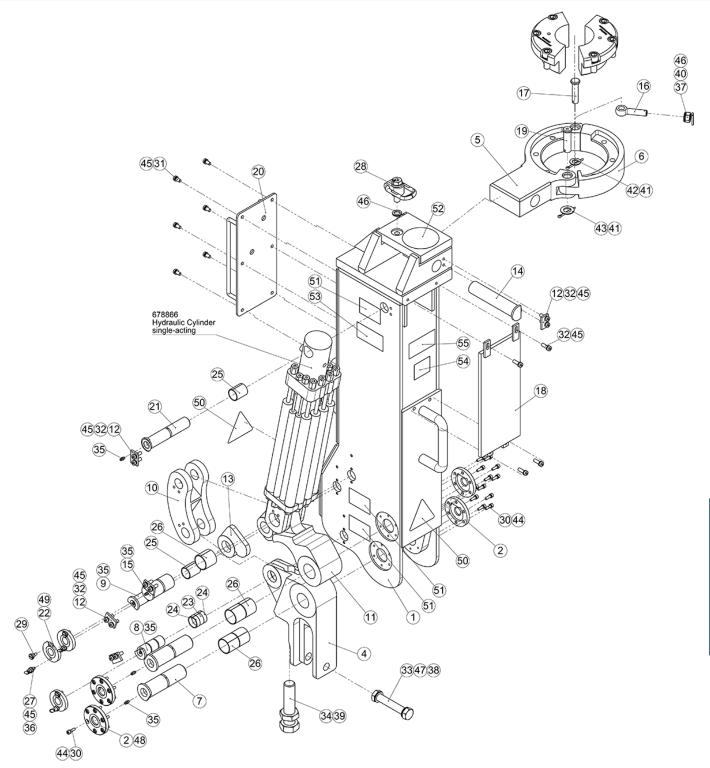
678801 Single Elevator Rotation System Drawing II
